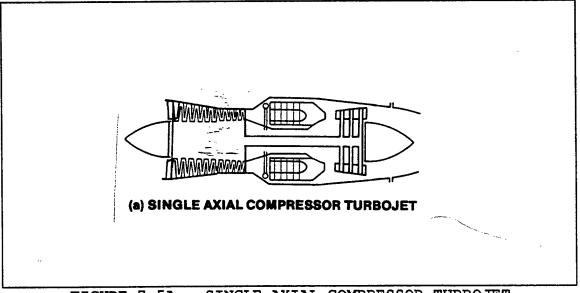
A. SINGLE AXIAL COMPRESSOR TURBOJET
